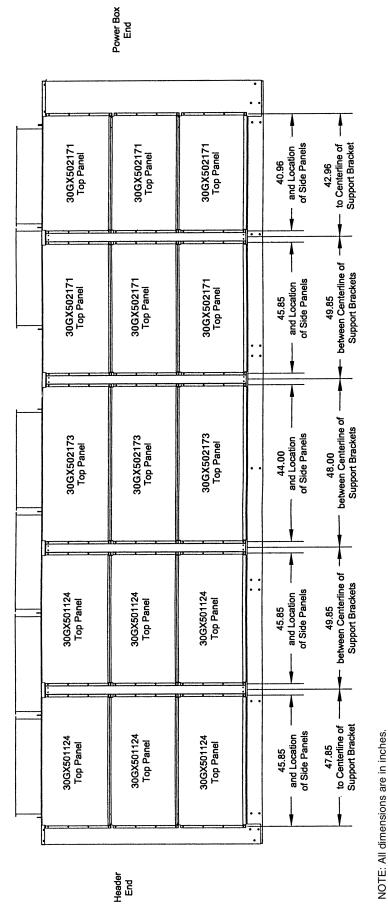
G — Unit Assembly, 30GX206, 226, 250 Oil Separator Side Only
